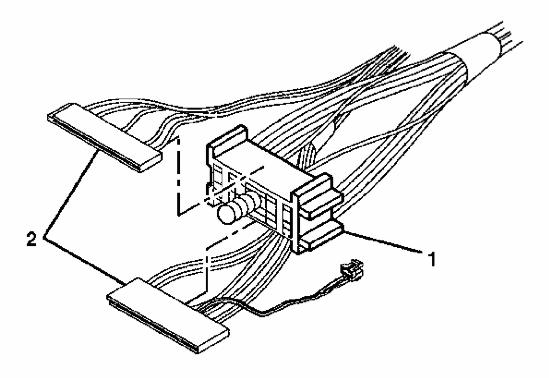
Turn Signal & Multifunction Switch Assembly Connectors Courtesy of GENERAL MOTORS CORP.
